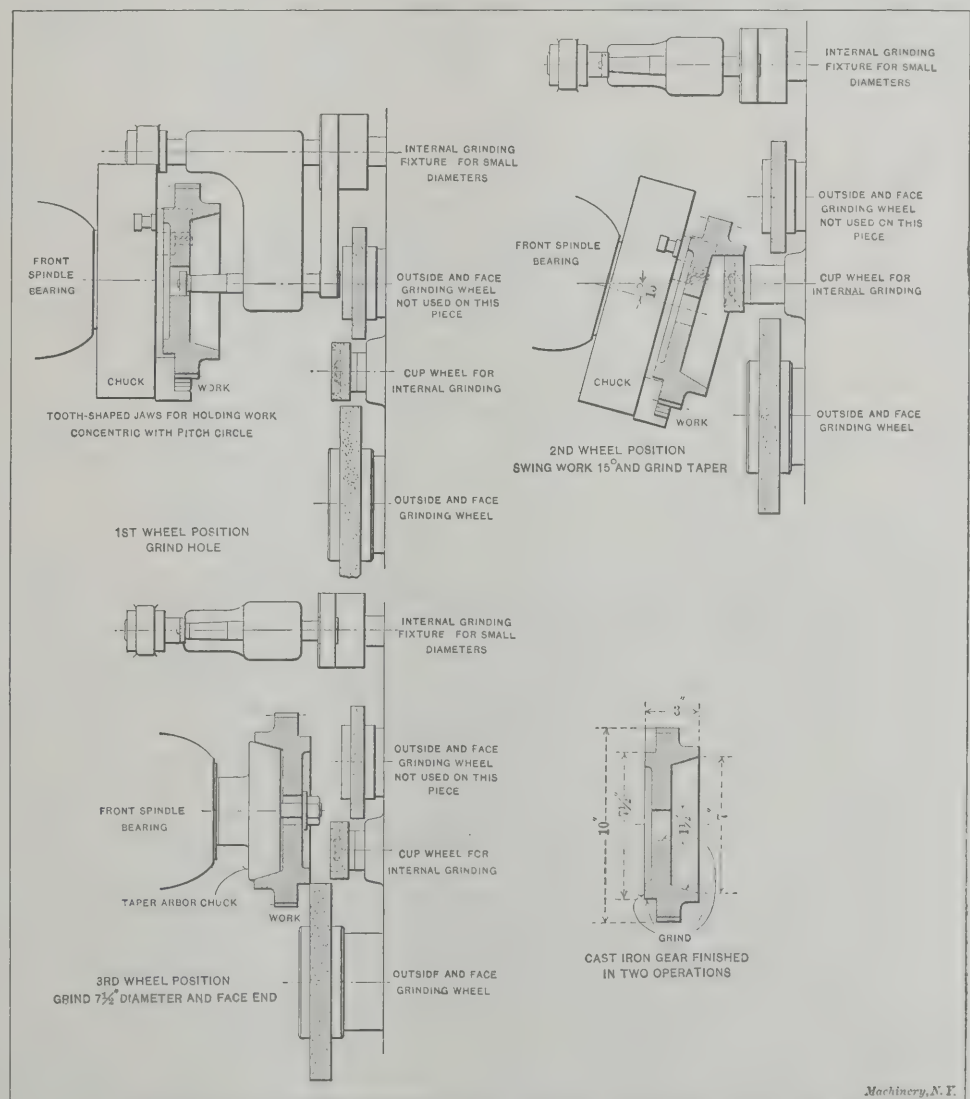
Diagram showing the Method of Finishing a Hardened Gear with Conical Clutch Surface
